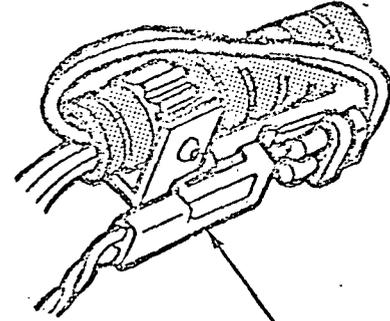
D-73 DFI/MD Engine Wiring Assembly (A)
